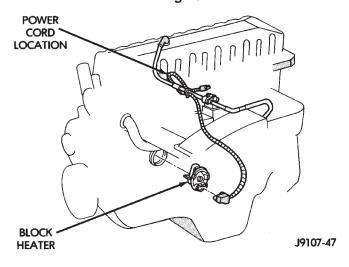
Heater and Cord—XJ with 4.0L 6-Cylinder Engine
